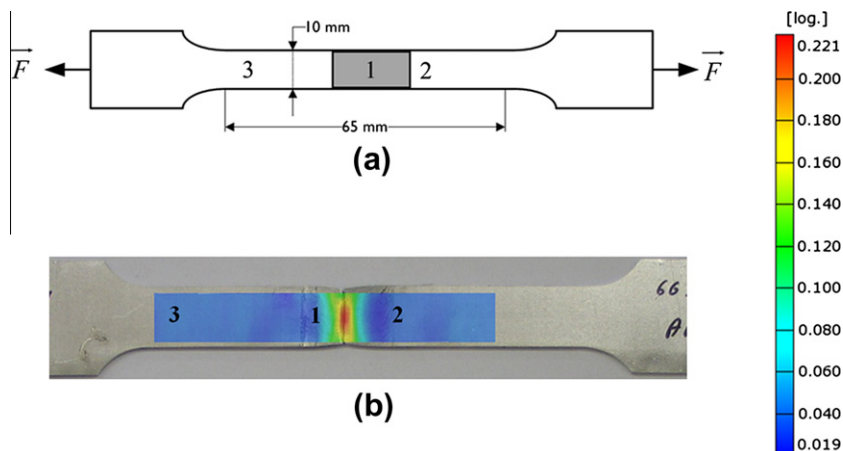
Transverse tensile specimen: 1 – Weld; 2 – HAZ; 3 – BM.
